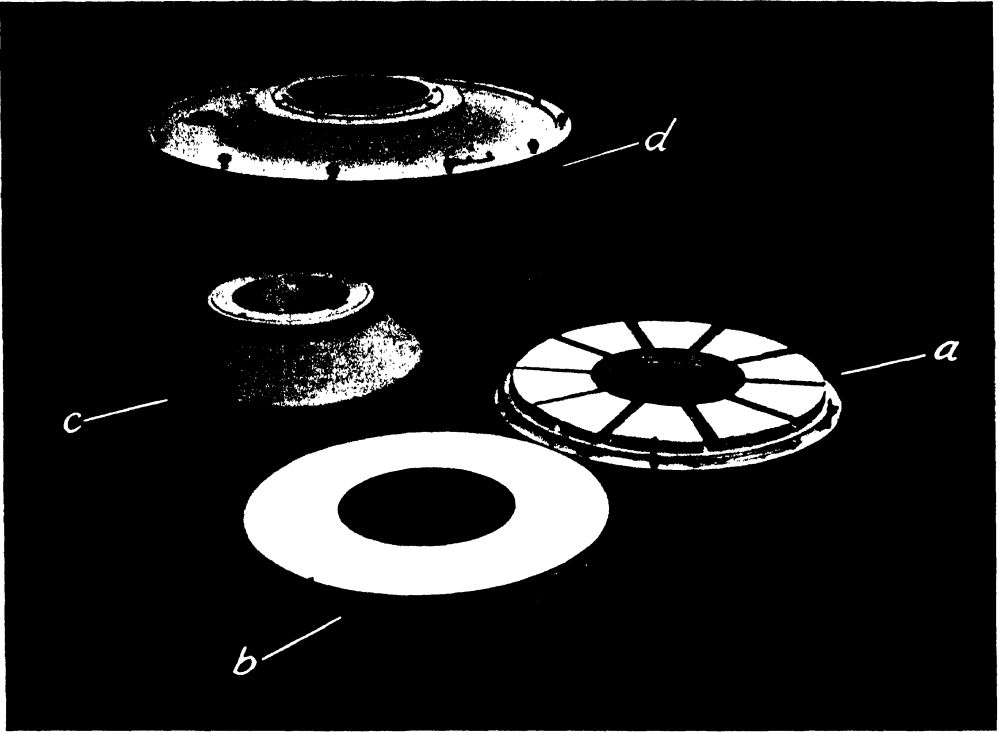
Component parts of a vertical pivoted-pad thrust bearing by Messrs. Escher-Wyss, Zurich
